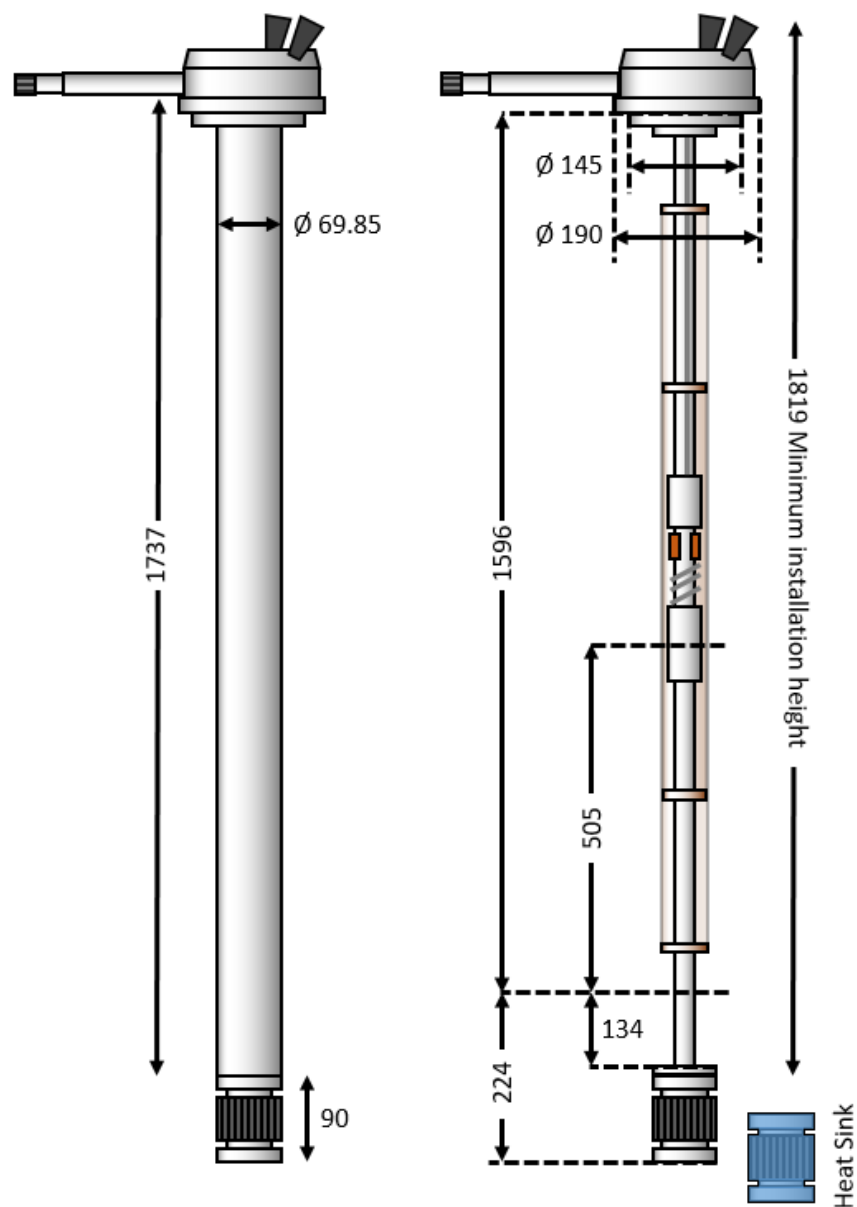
An adapted technical drawing of the VTI, showing key dimensions in millimeters. The drawing is not to scale.
